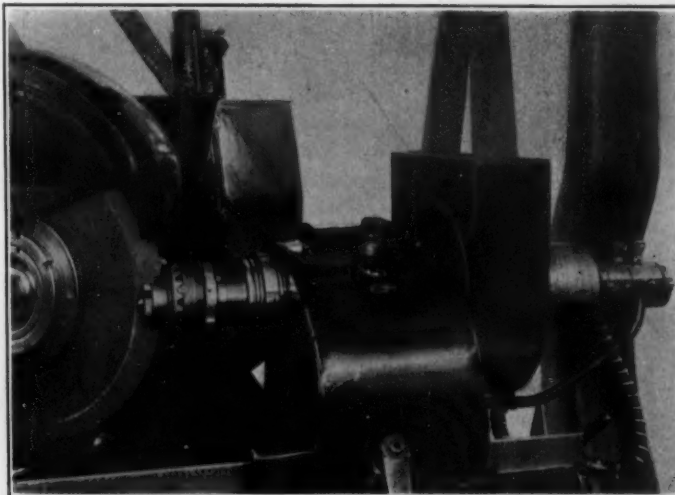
GRINDING TWO SURFACES WITH ONE WHEEL
